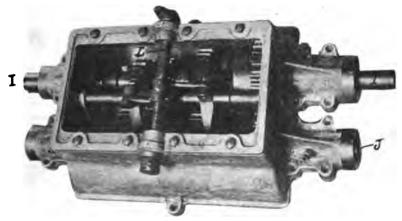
Harrison Sliding Gear, top cover of gea box removed. L, Rocker sleeve, loose on the rocker; the sleeve and rocker have arms connected to the gear shifting lever actuated sleeve and rocker, so that either the sleeve. L, or the rocker on which it is munted may be moved independently. The sleeve, L, is linked to the shifter marked S', Fig. 6, and works one pair of gears and a clutch at the right, Fig. 6. The rocker has fixed to it an arm linked to the shifter S, Fig. 6, to work the two left hand pairs of cacting gears, Fig. 6. I is the line shaft, J is the side shaft.
